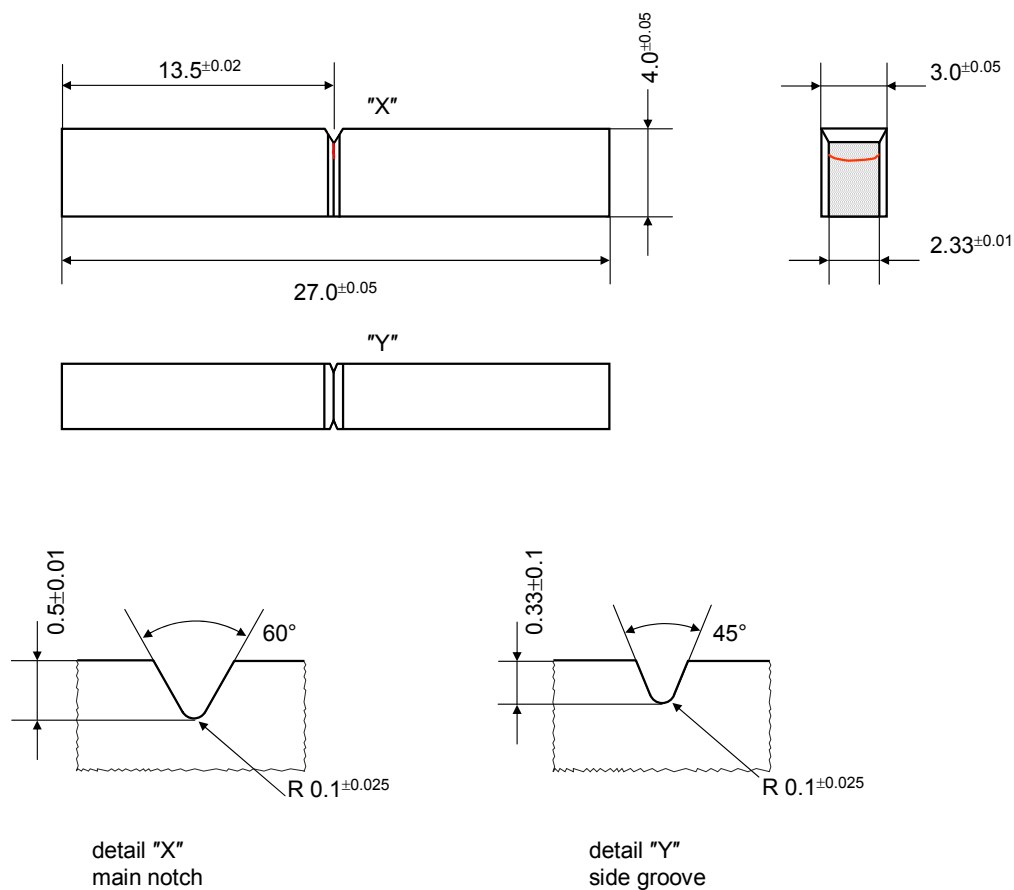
Mini-bar KLST specimen with “V” type starter notch and side grooves. Side grooves are machined after fatigue pre-cracking of the specimen. All dimensions in mm.
